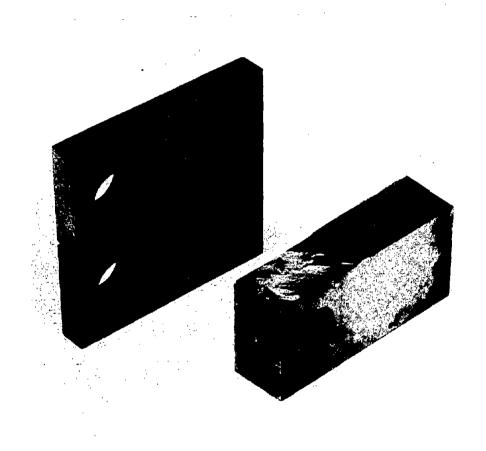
COMPACT TENSION SPECIMENS BEFORE AND AFTER TESTING
